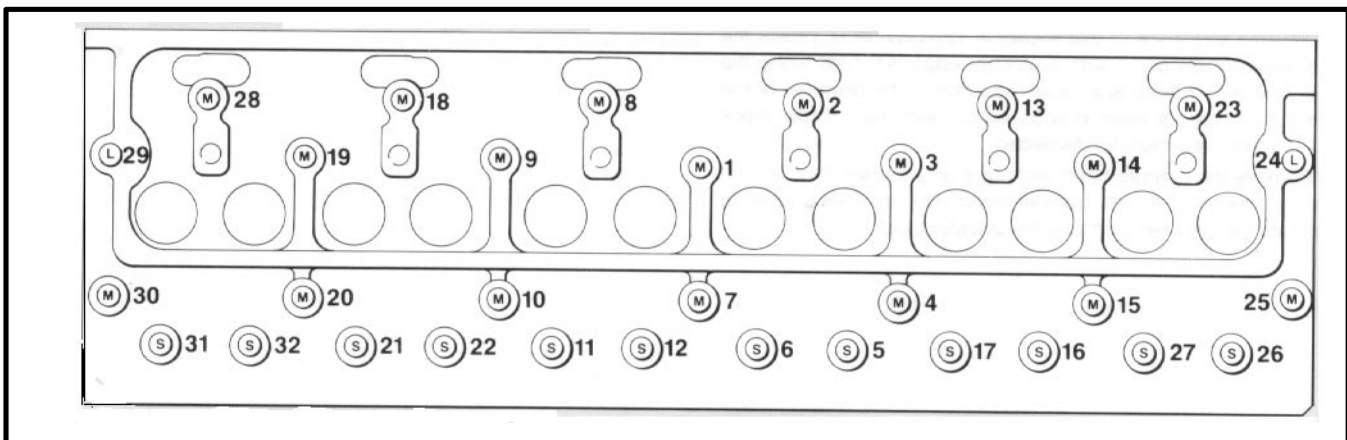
CYLINDER HEAD TIGHTENING SEQUENCE, 6-CYLINDER ENGINES
